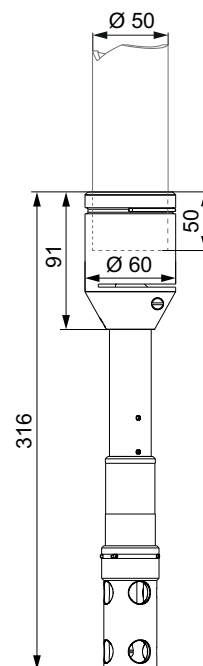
Dimensions of sensor with holder (in mm), pipe with outside diameter 50 mm not included
